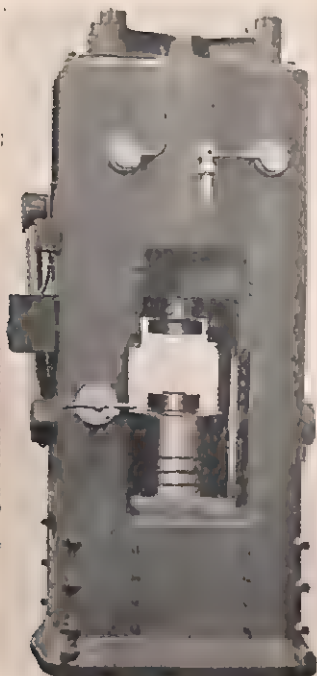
shows a press for forging automobile valves at the rate of 300 per hour. Some of the hydraulic rams in this machine move at a speed of 20 ft./sec., and the forging stroke is completed in less than $1/100$ sec. This disproves the old idea that hydraulic presses are necessarily slow.
